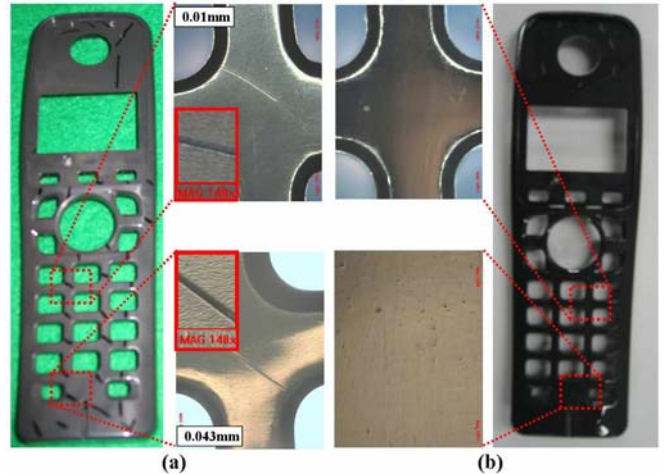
Comparison of weld-lines (a) Conventional injection molding (b) Rapid Heat & Cool Mold
